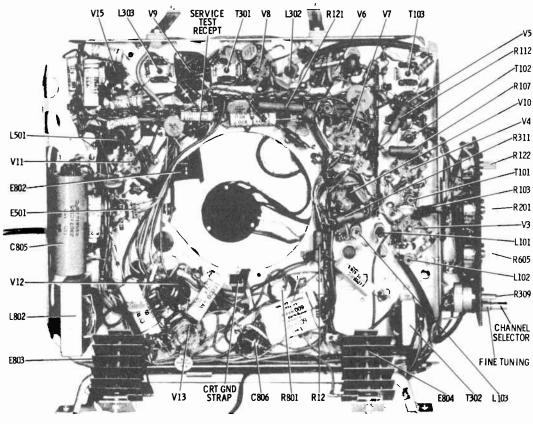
CHASSIS TS & LTS-430A-00 PARTS LOCATIONS
